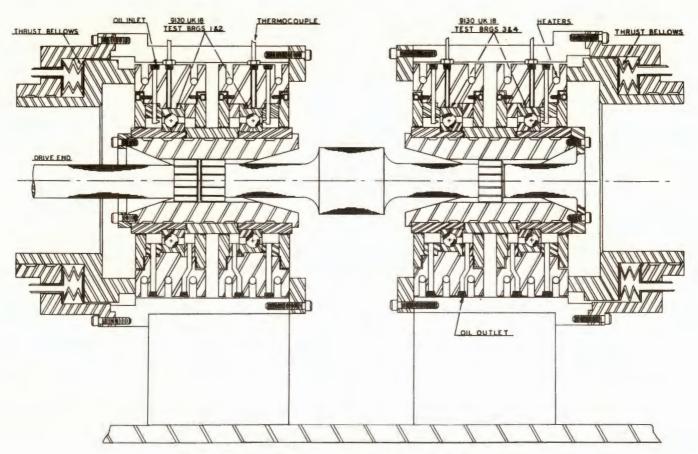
CROSS SECTION OF BEARING TEST RIG
